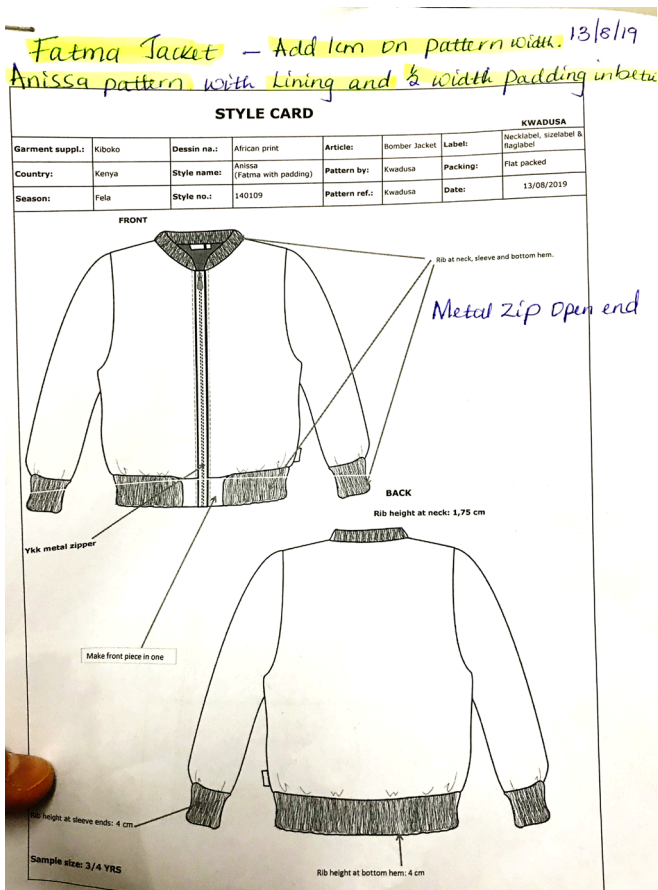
First page of the style sheet, with a sketch of the various garment views and added notes.
